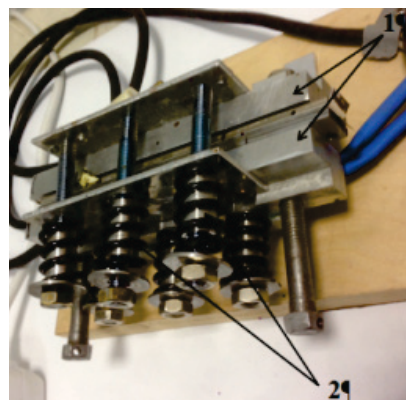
Photography of the tool that used for fabrication of joints (1-metallic heater which clamps the CC samples; 2-springs which provide compressive force).
